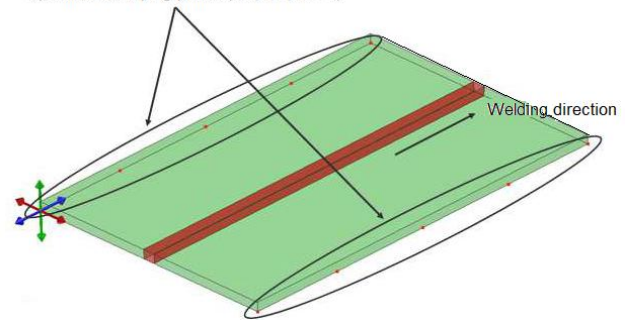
Conditions of the specimen during laser welding - fixing the specimen during welding and cooling.
